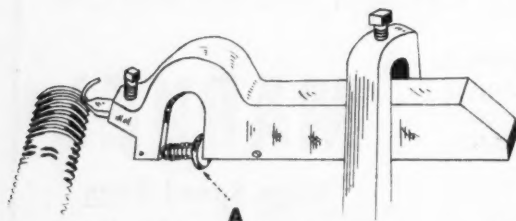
Combination Rigid and Flexible Tool Holder in Operation.
